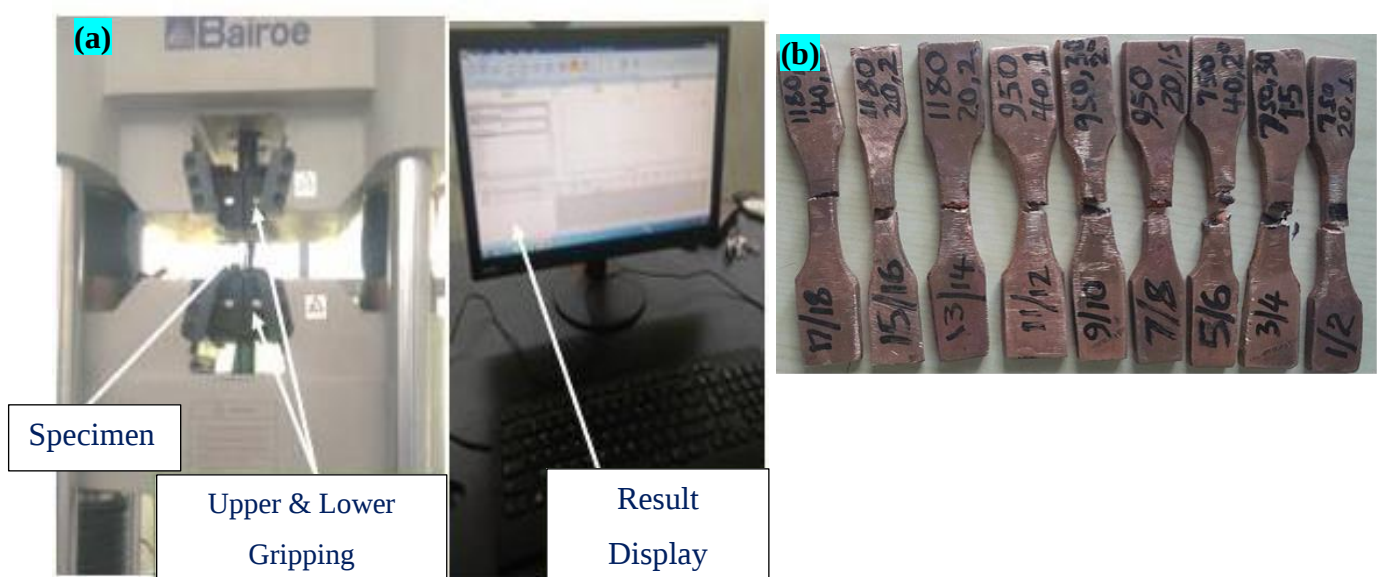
(a)Tensile test experimental set-up (at Ethiopian Technical Institute), (b) Specimens after the tensile test
